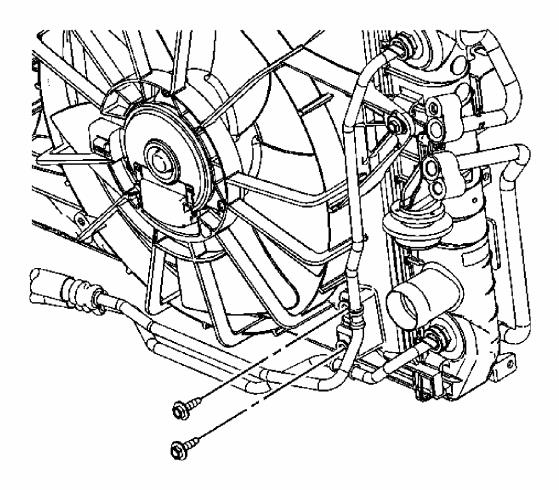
Identifying Transmission Oil Cooler Pipe Retaining Bolts Courtesy of GENERAL MOTORS CORP.
